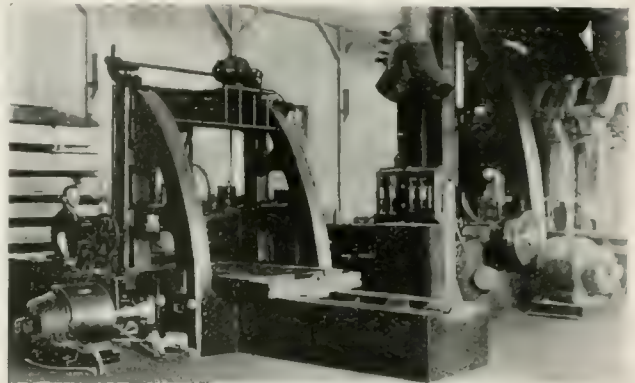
PLANERS EQUIPPED WITH REVERSING MOTORS AND AUTOMATIC UNIT-SWITCH CONTROL
